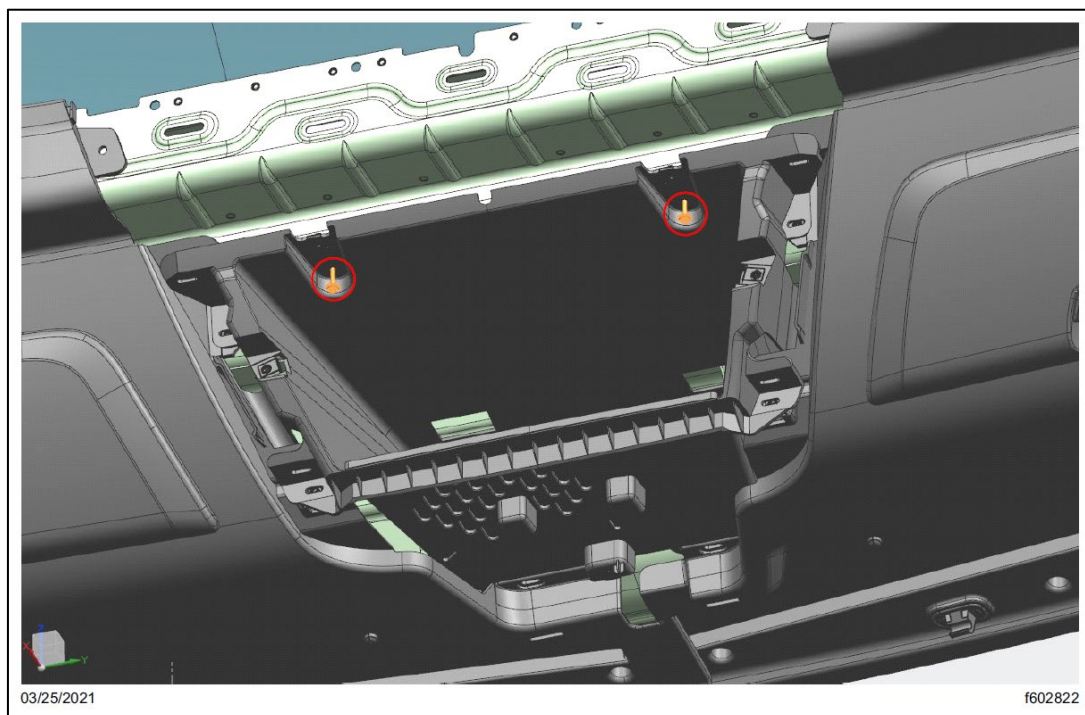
, Fasteners That Attach the Center Storage Bin to the Cab Roof
